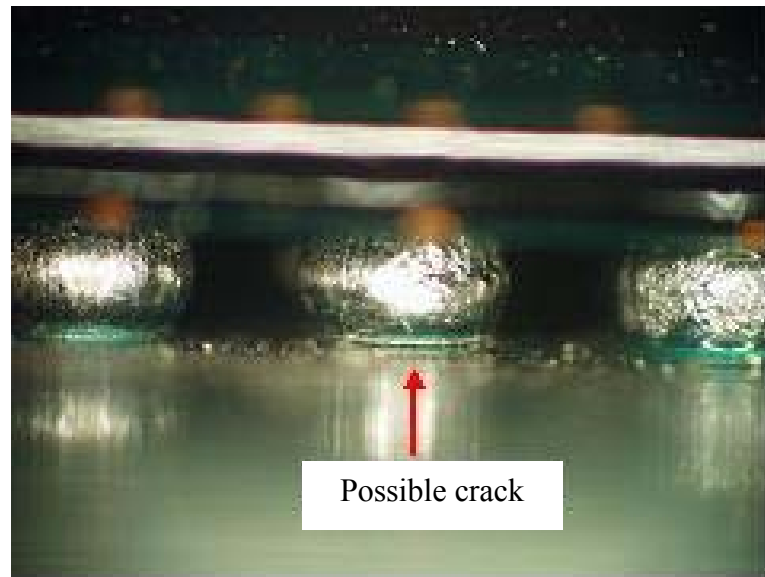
A perimeter visual inspection image from one package with a possible cracked solder joint
